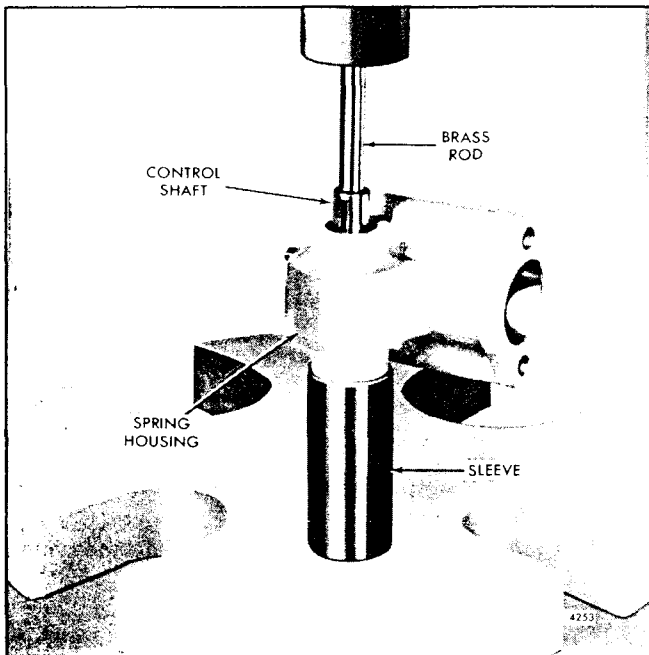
Removing Shaft and Bearing from Spring Housing
